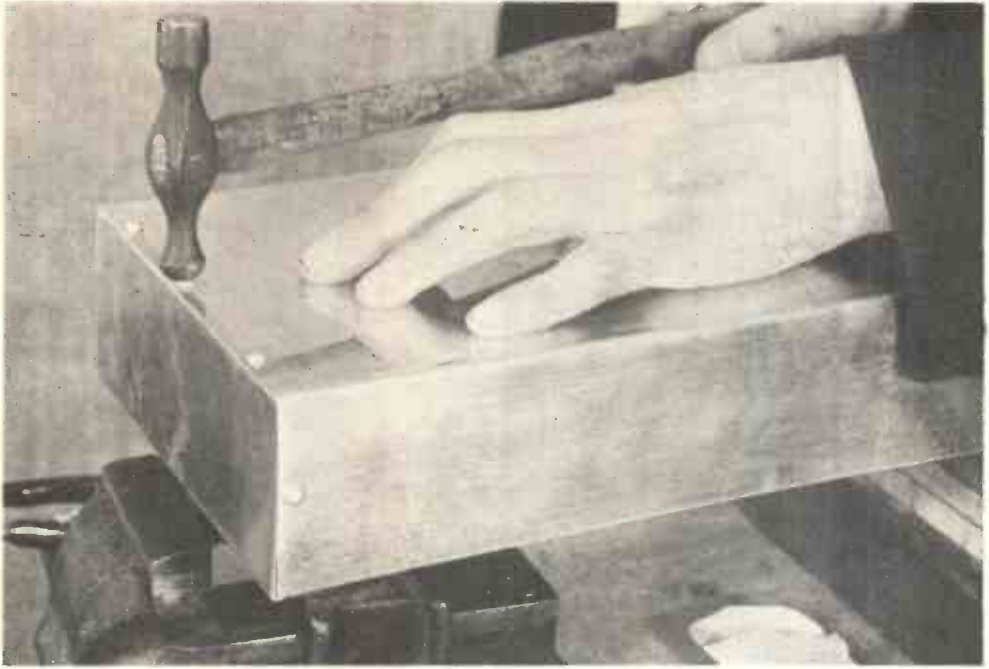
USING A BALL-PEINE HAMMER ON THE RIVETS.
